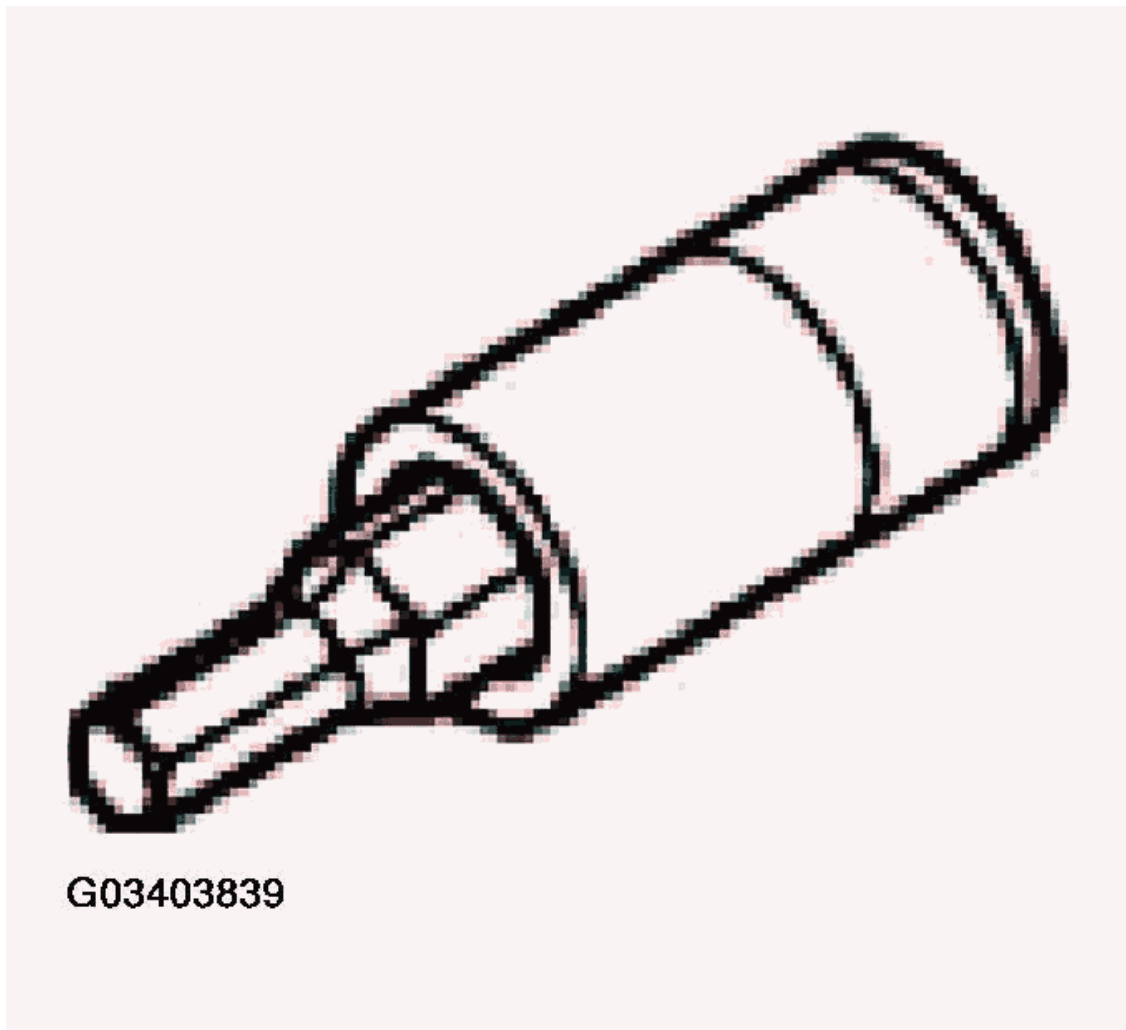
Identifying BMW Special Tools - Tool # 24 2 320
